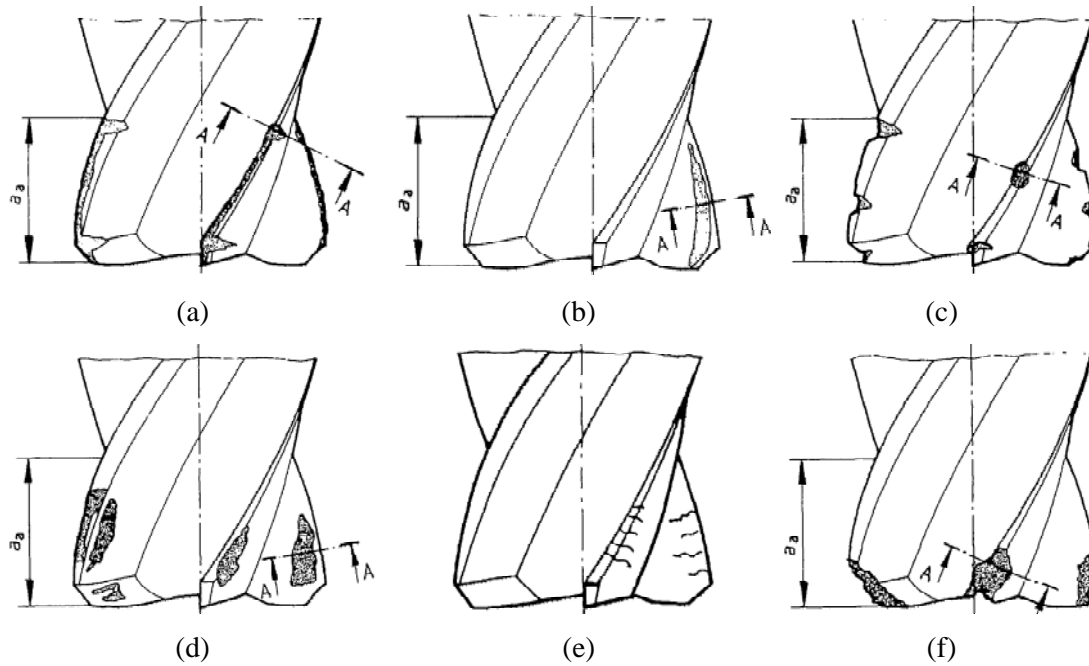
Sketches of (a) flank wear, (b) crater wear, (c) chipping, (d) flaking, (e) cracks, and (f) catastrophic failure [29].
